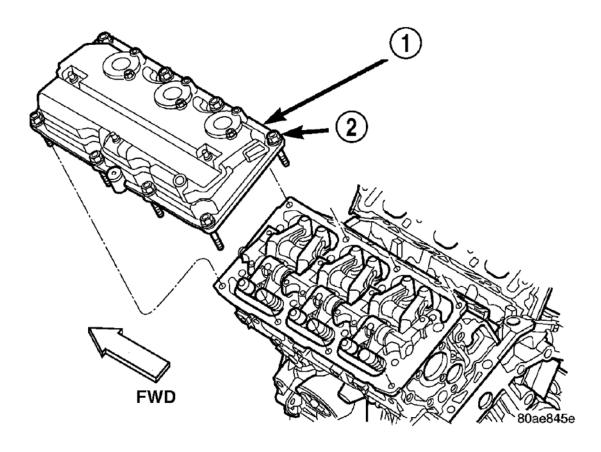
Removing/Installing Cylinder Head Cover Courtesy of CHRYSLER LLC
